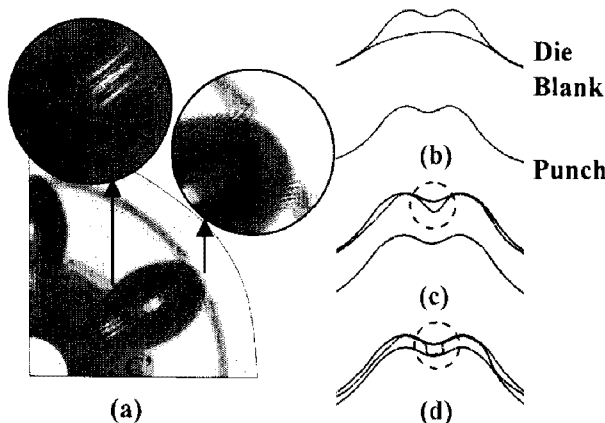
Deformed shape and section shape at the section C-C' at the first stage with the modified design when the stroke is (a) final stroke; (b) 36.8mm; (c) 50.8mm; (d) 55.8mm
